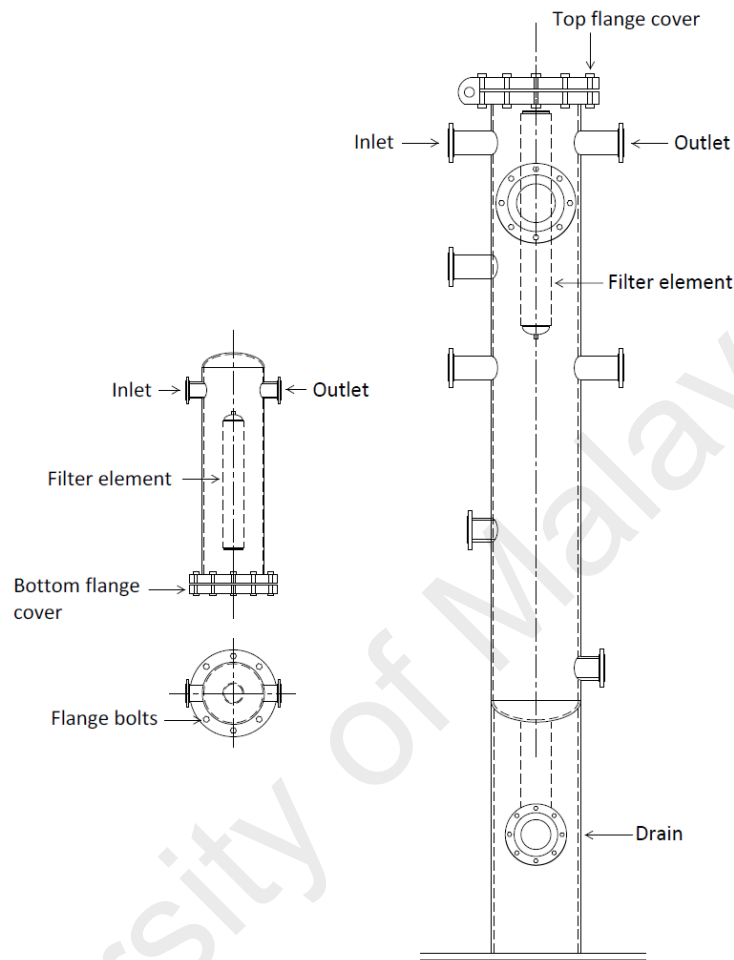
Typical 2D sketch of a filtering component: bottom flange type (left) and top flange type (right)
